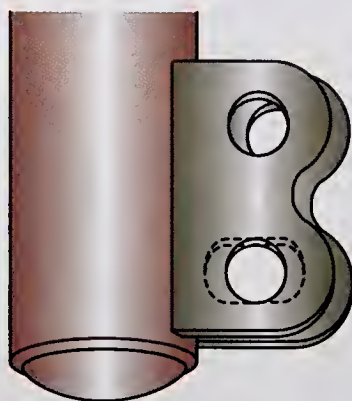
Elongated lower strut-to-knuckle bolt hole for camber adjustment.
